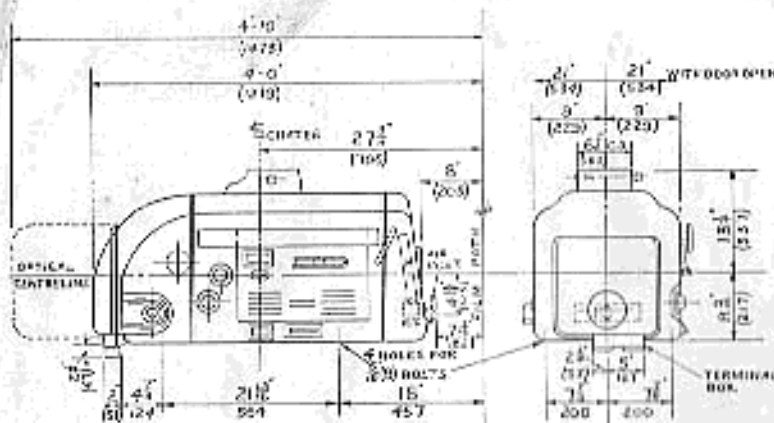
Outline of Lantern. Principal dimensions in inches and millimetres.
